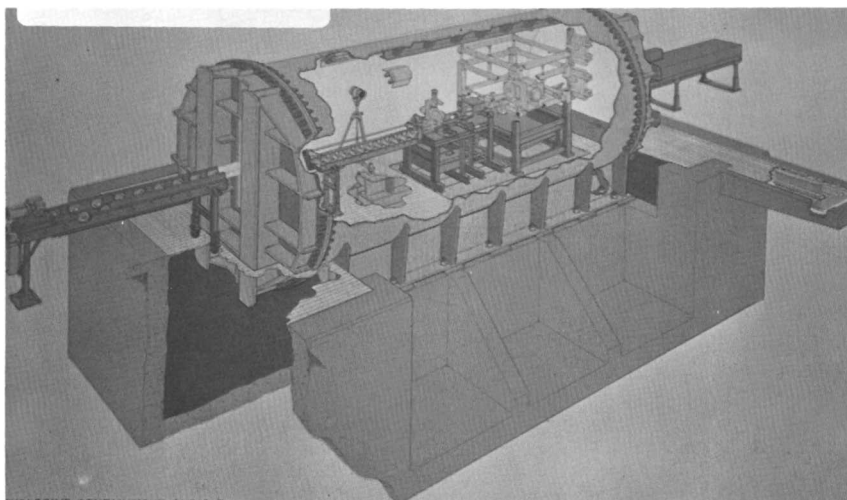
Explosive containment cubicle with projectile saw machine with burster pull and size reproduction station
